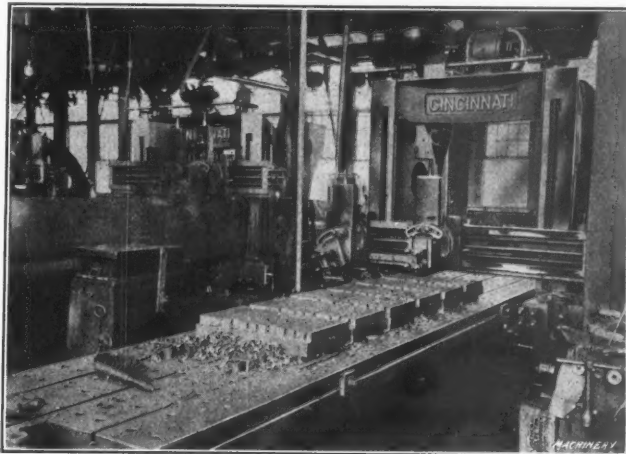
Planing Teeth in Steel Racks for Frog and Switch Planers
